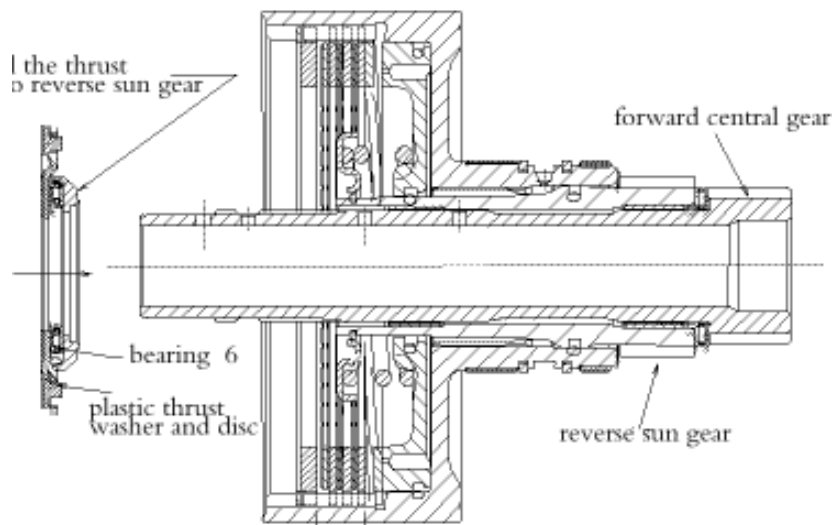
and 8.33 assembly number: 6 bearing and pressure disc to clutch C3 assembly
